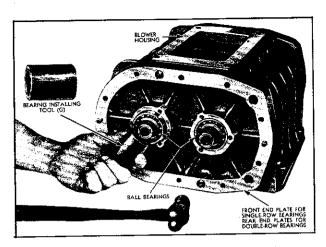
Installing Blower Rotor Shaft Bearings into End Plates.
